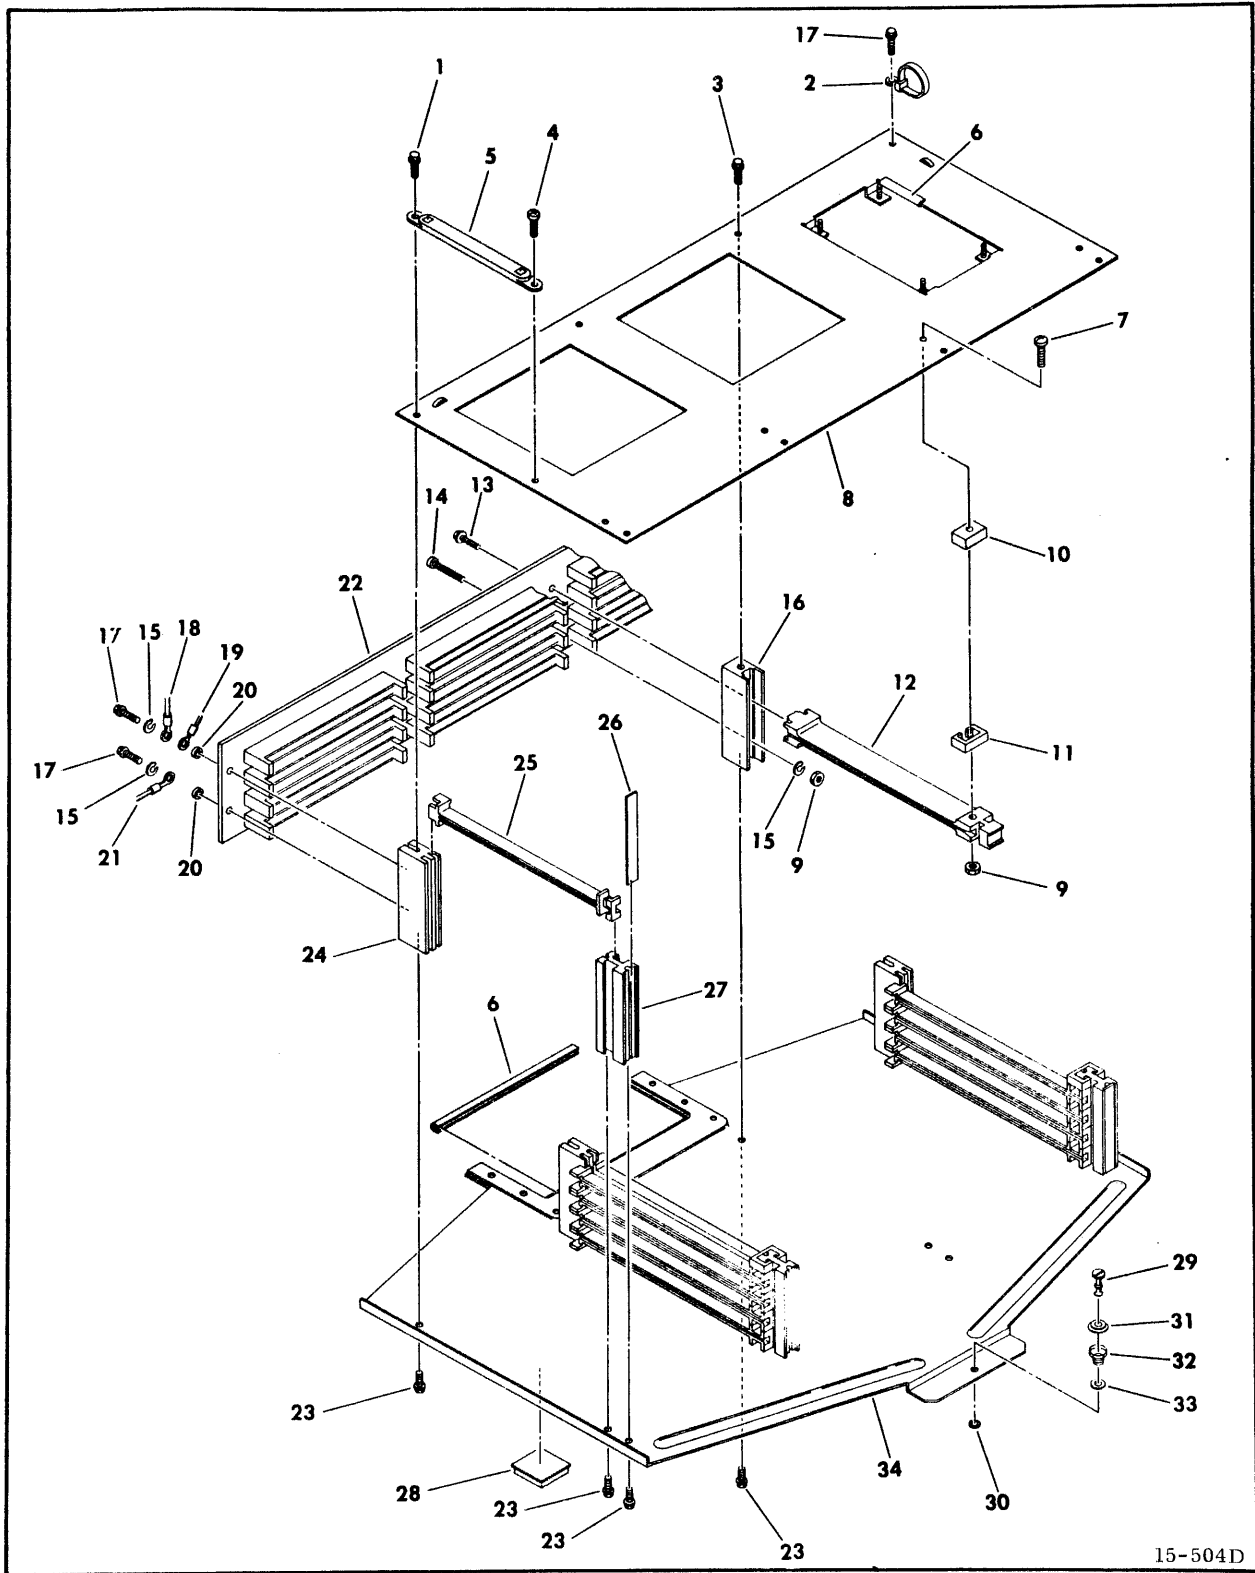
Base Frame Assembly (Sheet 2 of 2)
